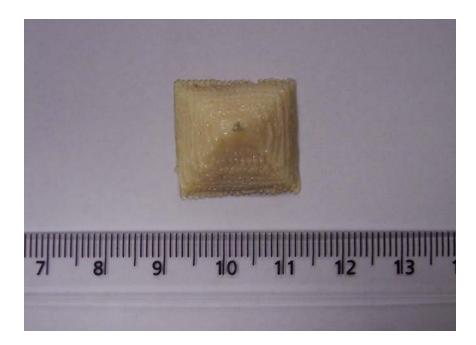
15: One of the produced parts –This part was produced with Design-A deposition system
